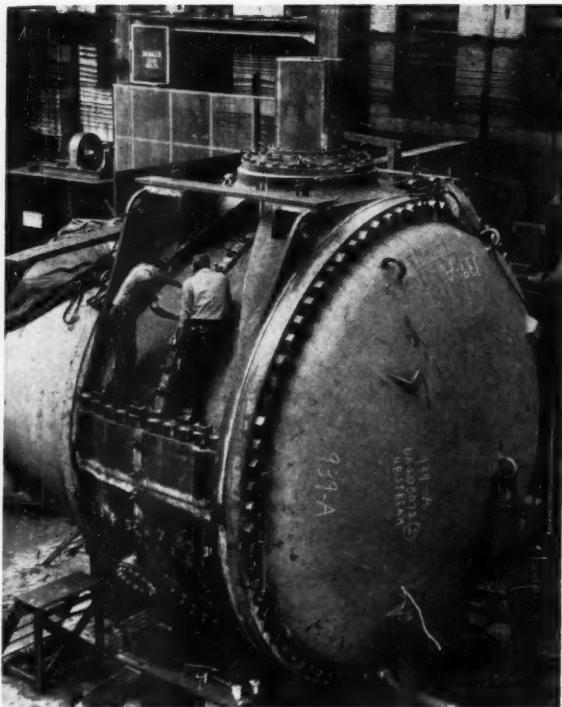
Shop pressure test of 16-ft high-head butterfly valve
